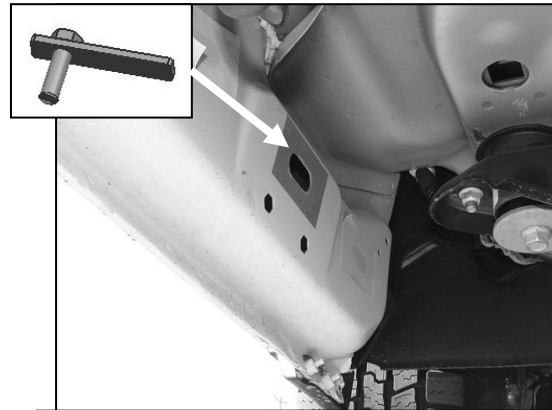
Use the loose Hex Bolt as a handle. Insert the Bolt Plate into the oval hole and feed the threaded end out either factory hex shaped hole. IMPORTANT: Do not let go of the hex bolt until after Plastic Retainer has been threaded onto bolt (Fig 5)
